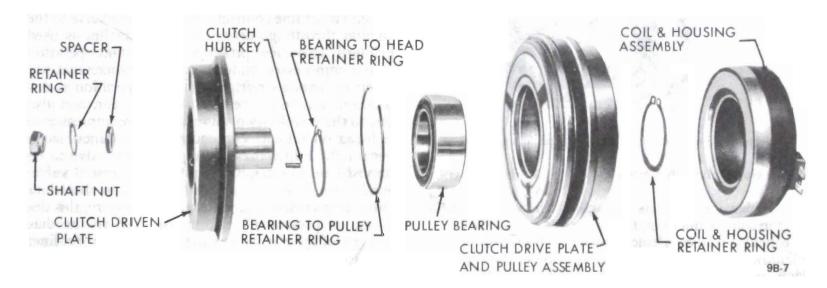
B-7 Magnetic Clutch and Pulley Assembly
